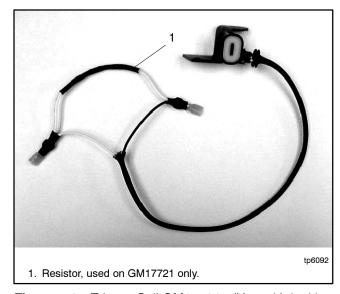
Trigger Coil GM17721. (Use with ignition module 278903.)
